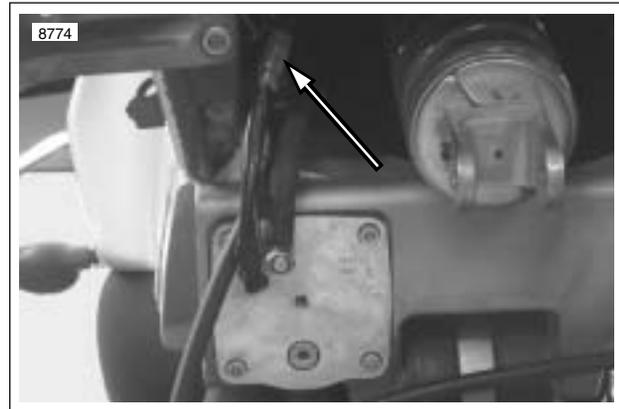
Fuel Pump connector [86] (swingarm removed for illustration)
